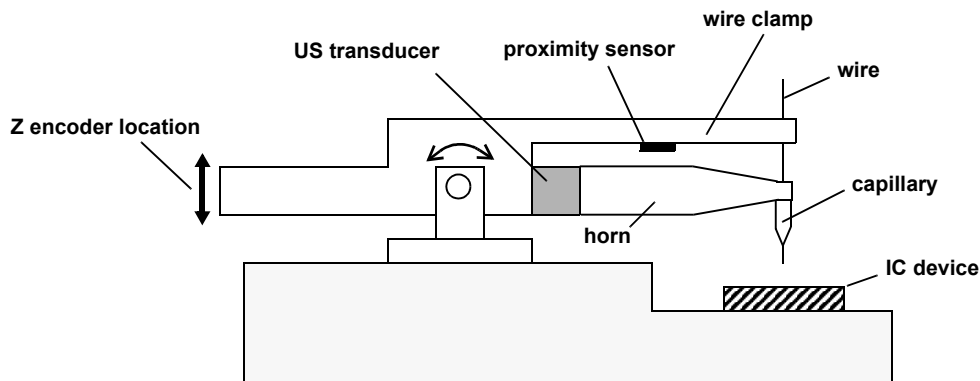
Schematic drawing of the Esec 3100 bonthead rocker arm assembly. Dimensions not to scale [46].
